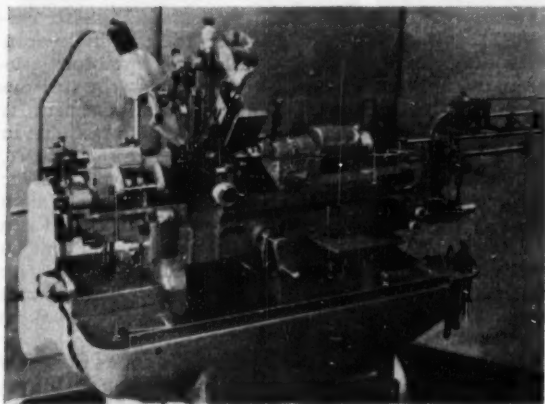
Type AS-7 Isomatic high-precision automatic lathe with five radial tool slides and three spindle drilling attachments
